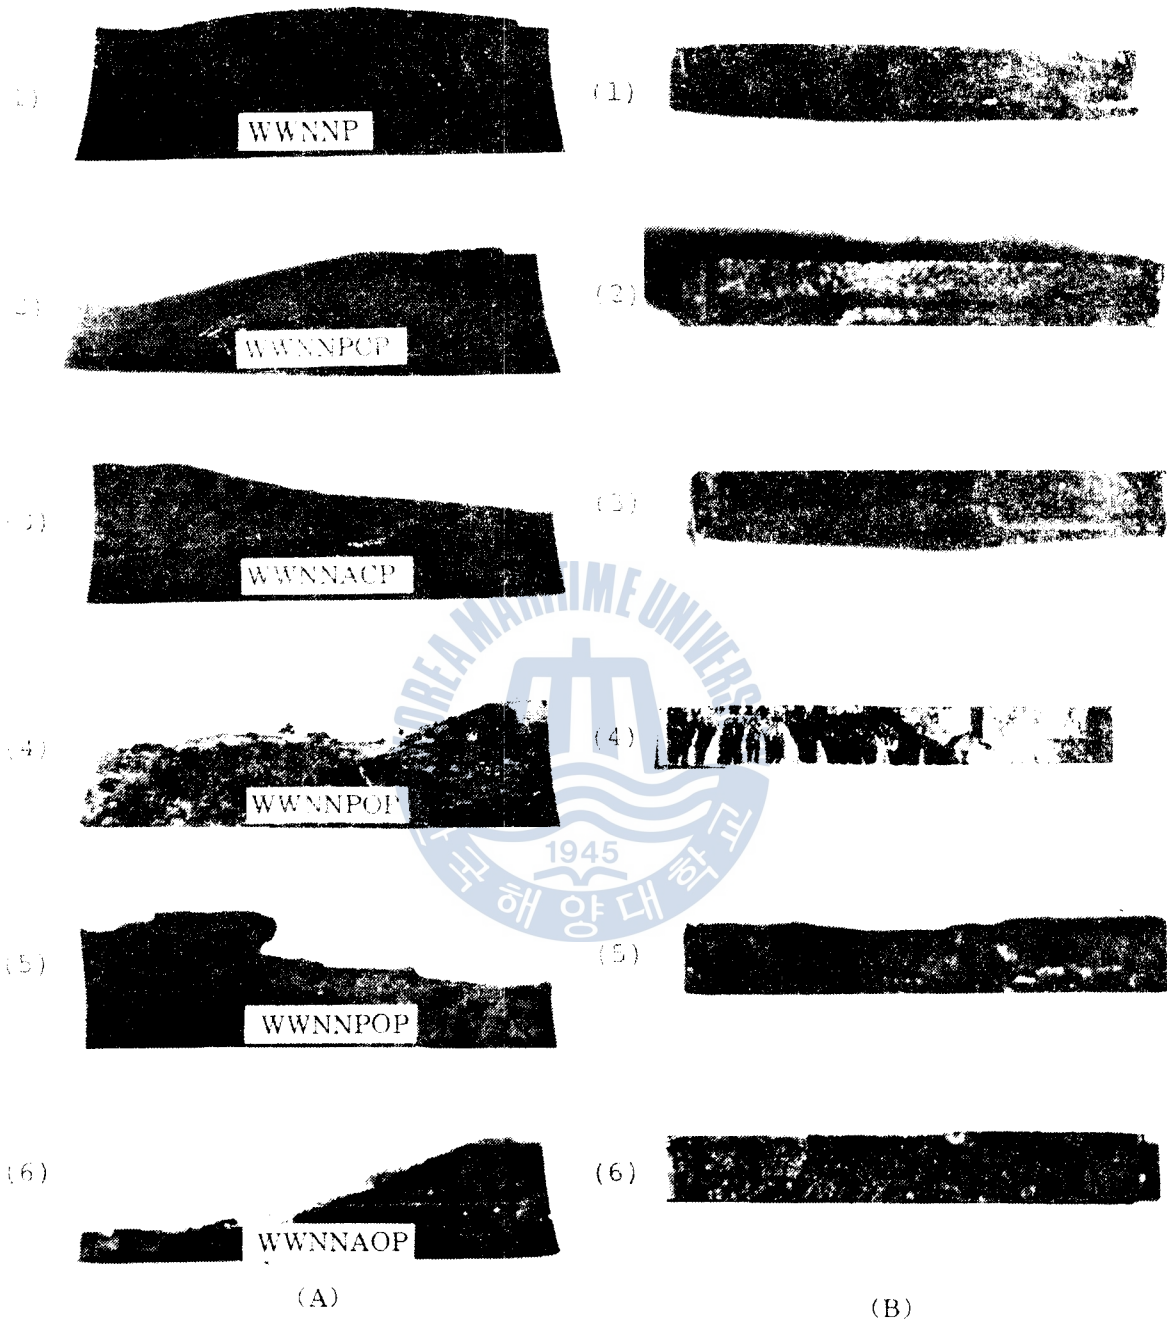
Surface and cross-sectional surface of cracked and fractured specimen.
